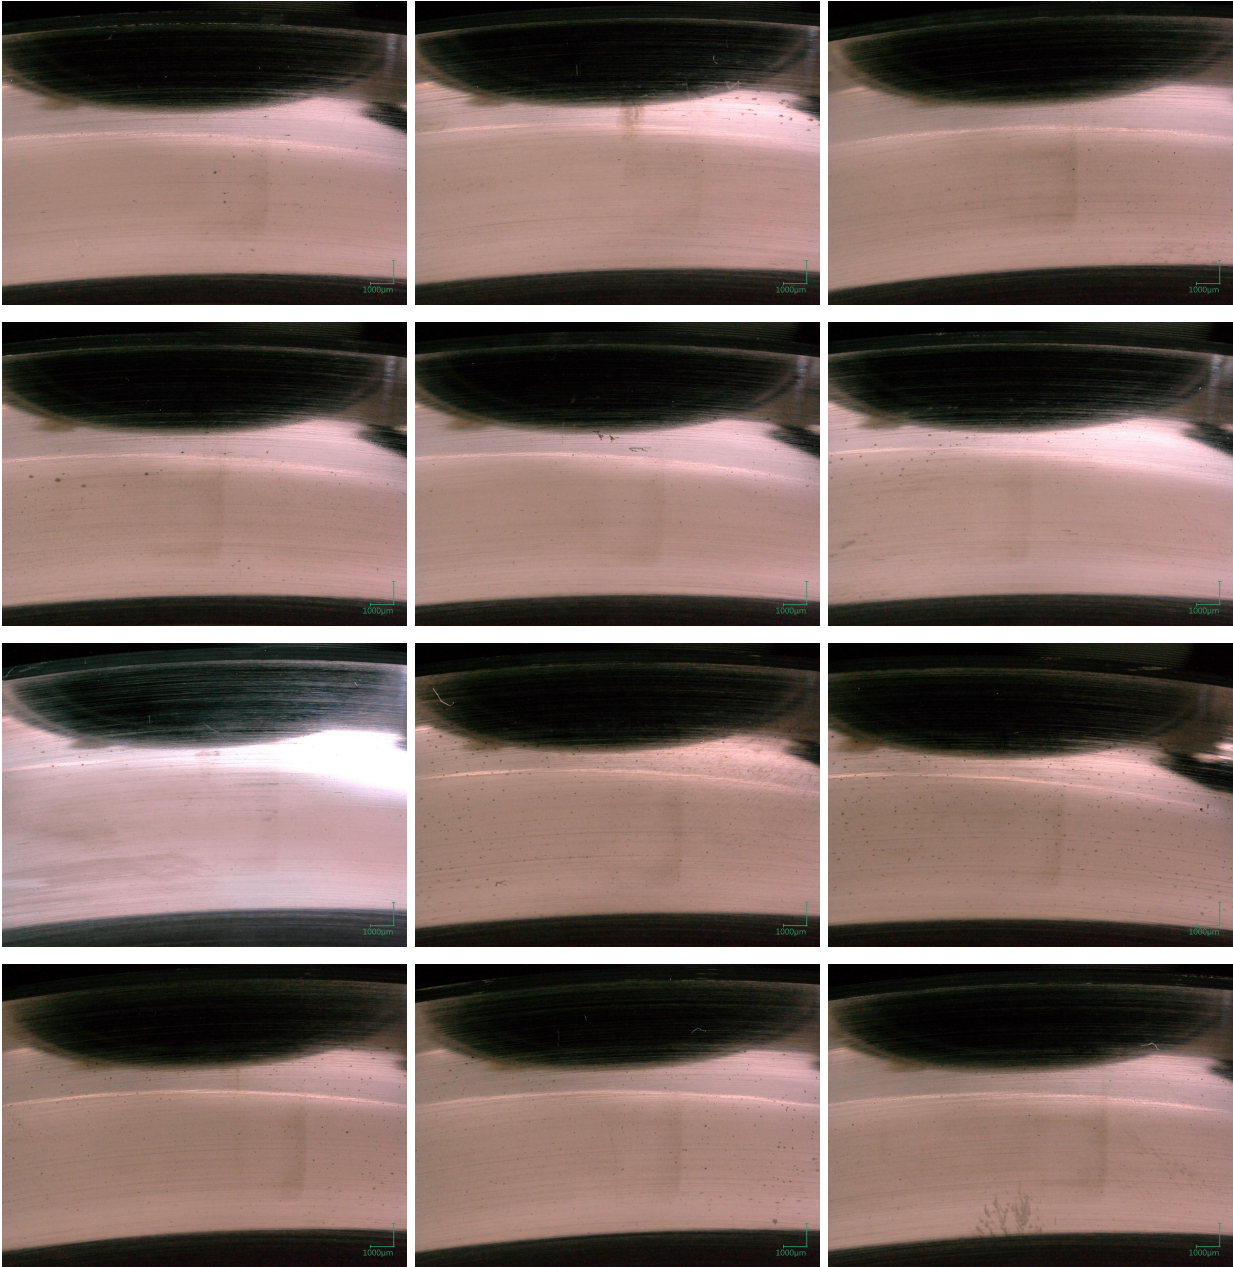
Raceway condition inner ring, Test ID 5, Bearing ID 0009
